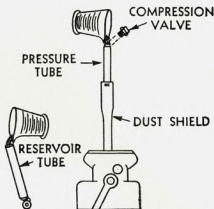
Rear Shock Absorbers Should Be Disassembled for Refilling
